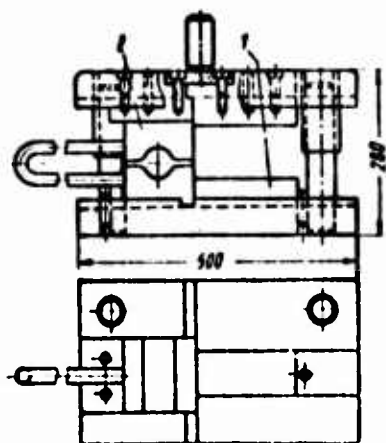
Universal attachment for forging by drawing of stepped forgings [3]: 1 - shift hammer blocks; 2 - shift swages (or a pair of other hammer blocks).
